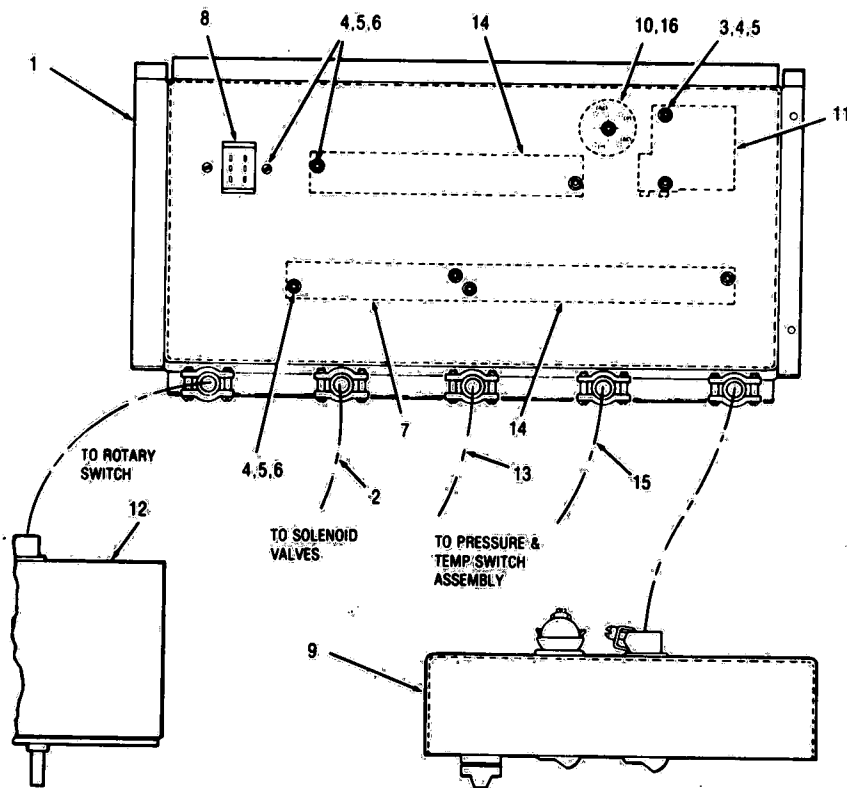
POWER SWITCH RECEPTACLE ASSEMBLY (For Units Shipped After 9/76) — SHEET 1 OF 3.
